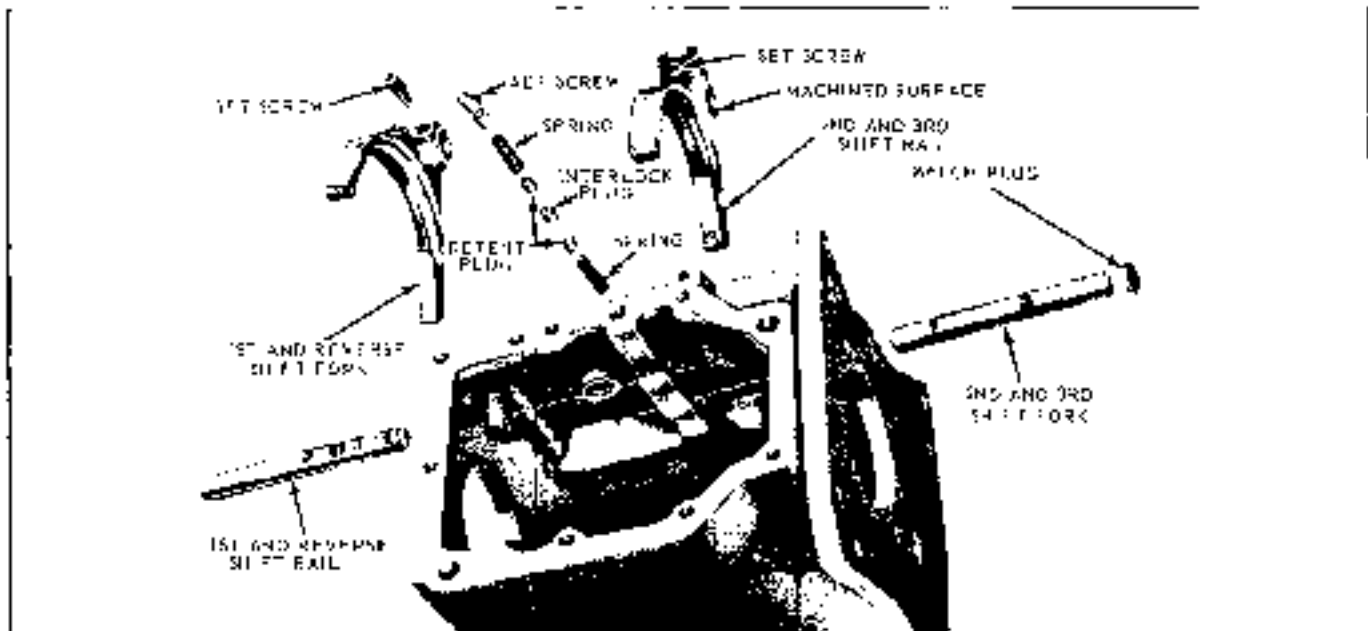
A-7 Shift Rails, Forks, Detent Plugs and Detent Springs
